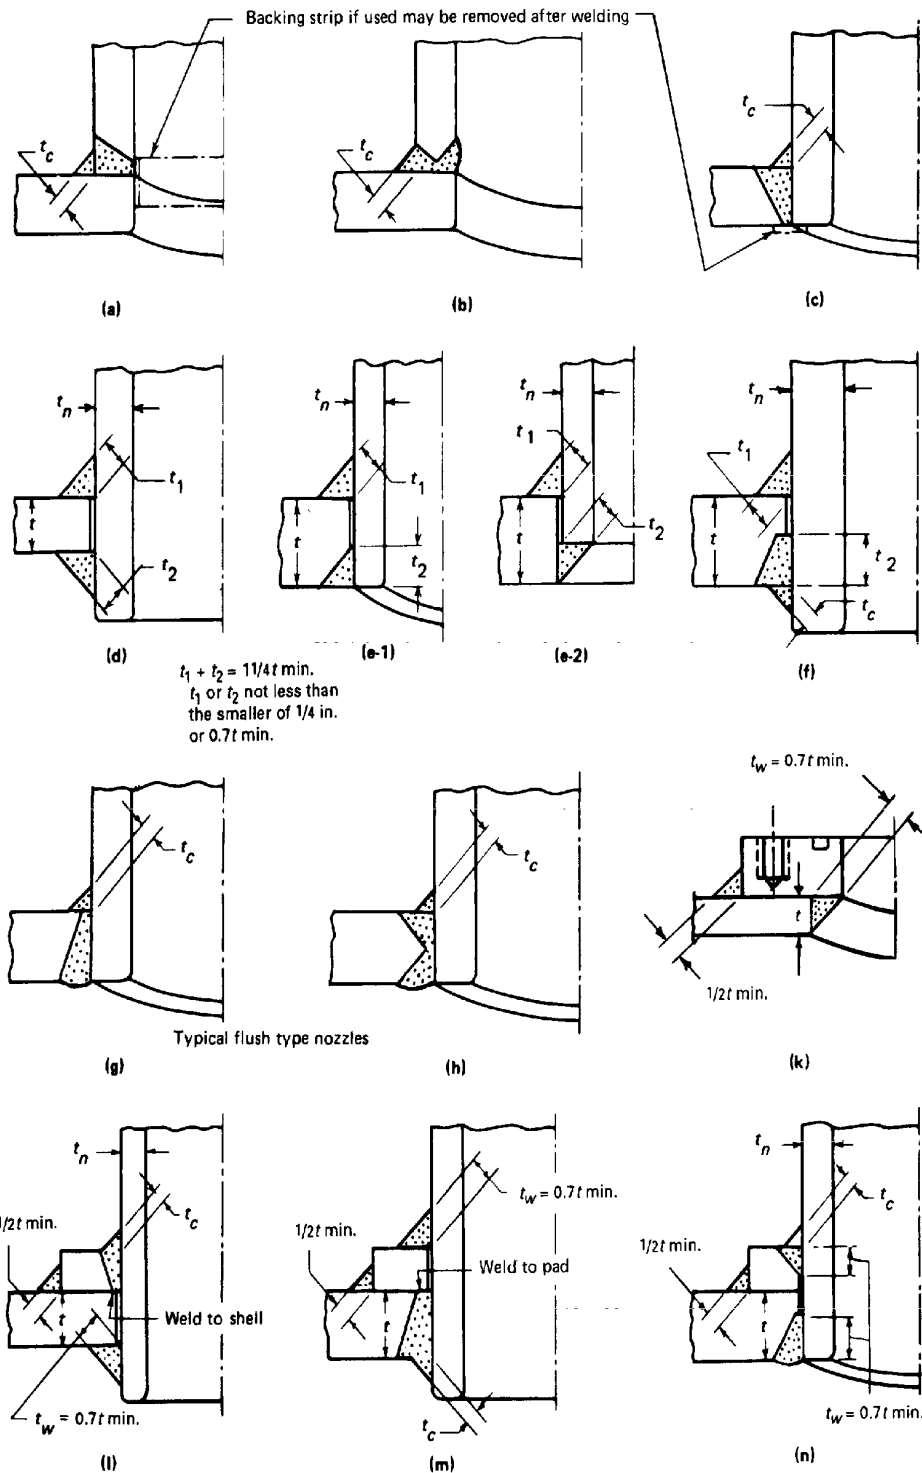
SOME ACCEPTABLE TYPES OF WELDS FOR FITTINGS, NOZZLES, AND OTHER CONNECTIONS TO SHELLS, DRUMS, AND HEADERS
